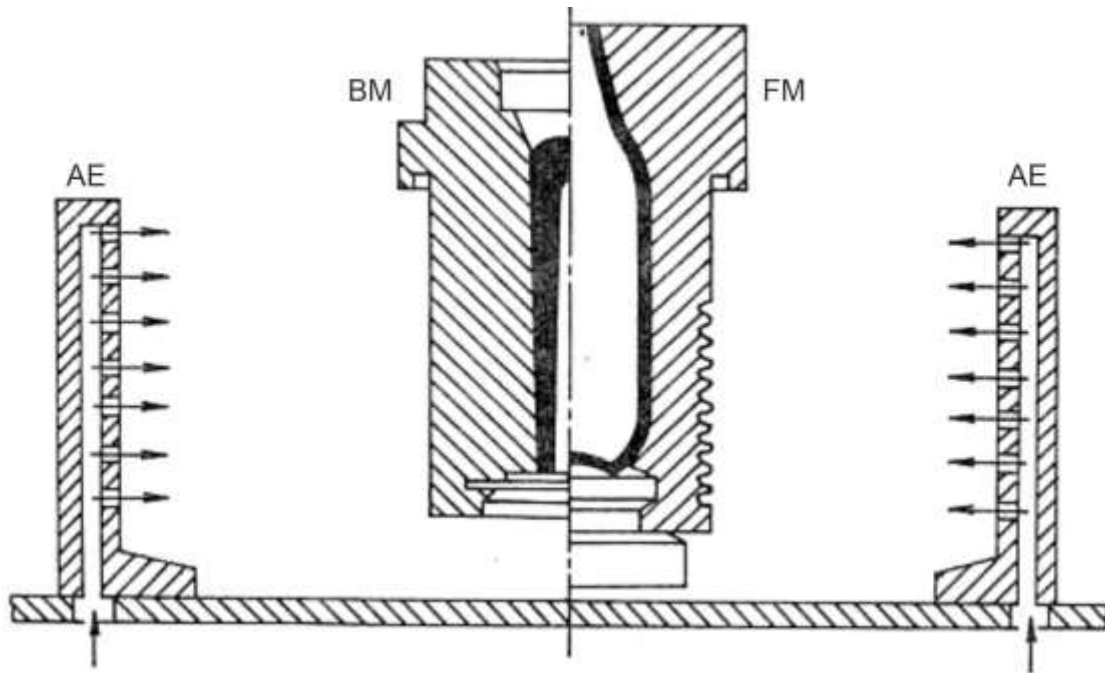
Diagram of radial cooling of moulds with "cooling stacks": BM - blank mould, FM - finish mould, AE - air extensions
